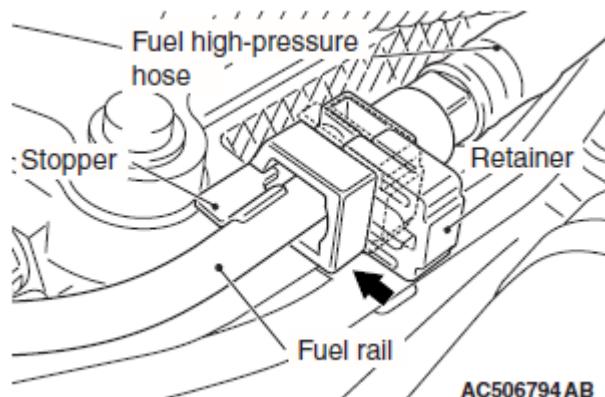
Identifying Fuel High-Pressure Hose To Fuel Rail
